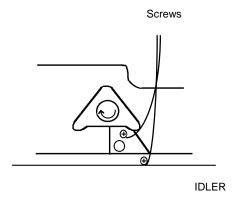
Idler Roll Adjustment Plate (showing adjustment screws)
